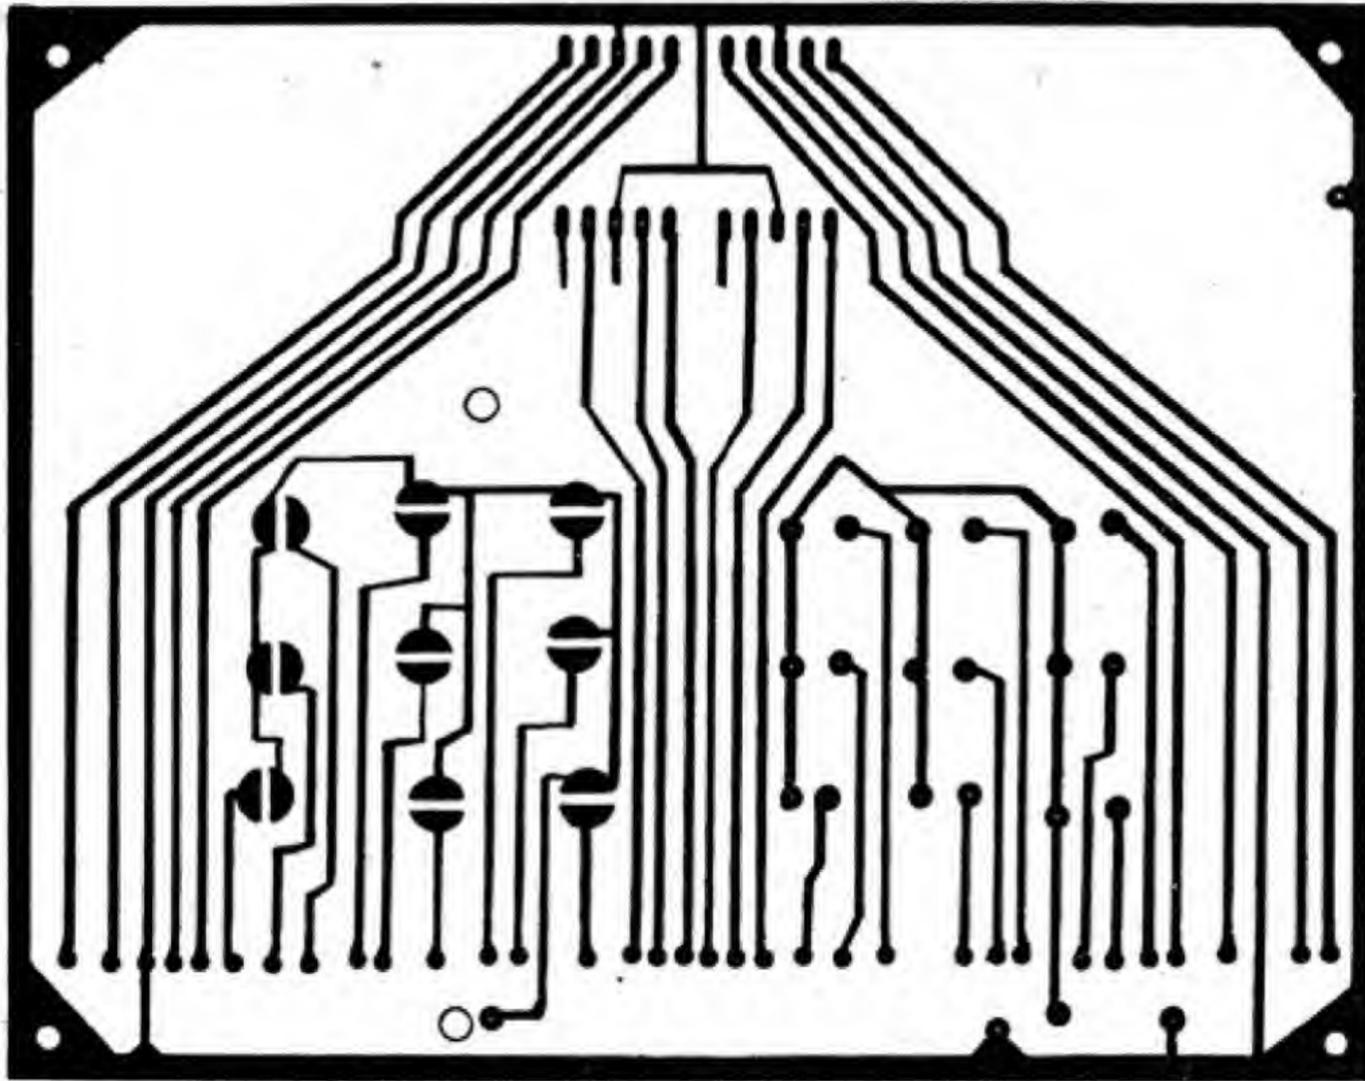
Actual size PCB layout for dotted lines shown in fig.1.
